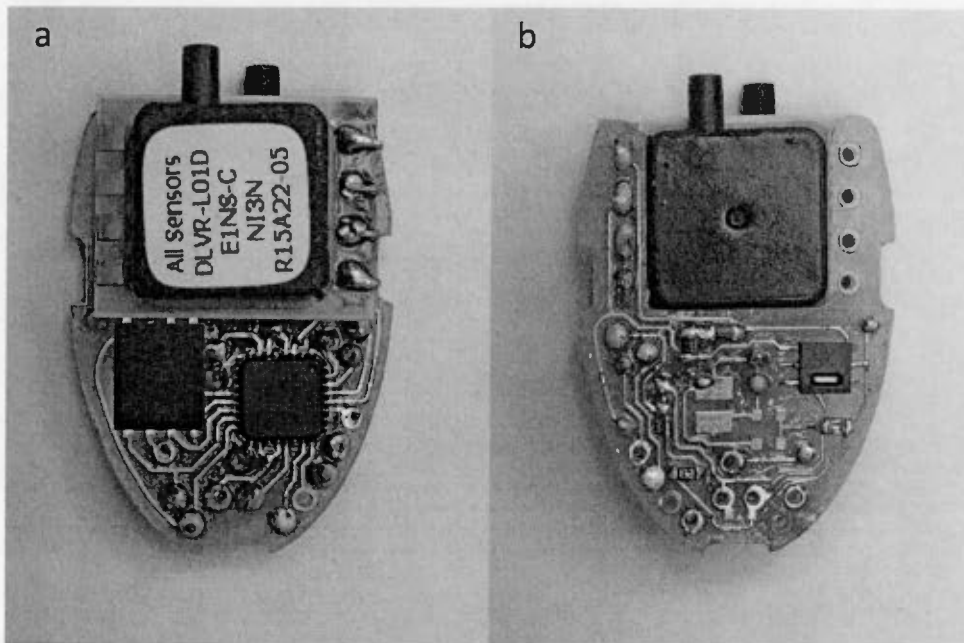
A complete electronic board including all components. (a) Top view. (b) Bottom view
